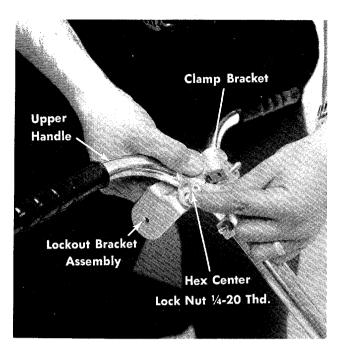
LOCKOUT BRACKET ASSEMBLY
